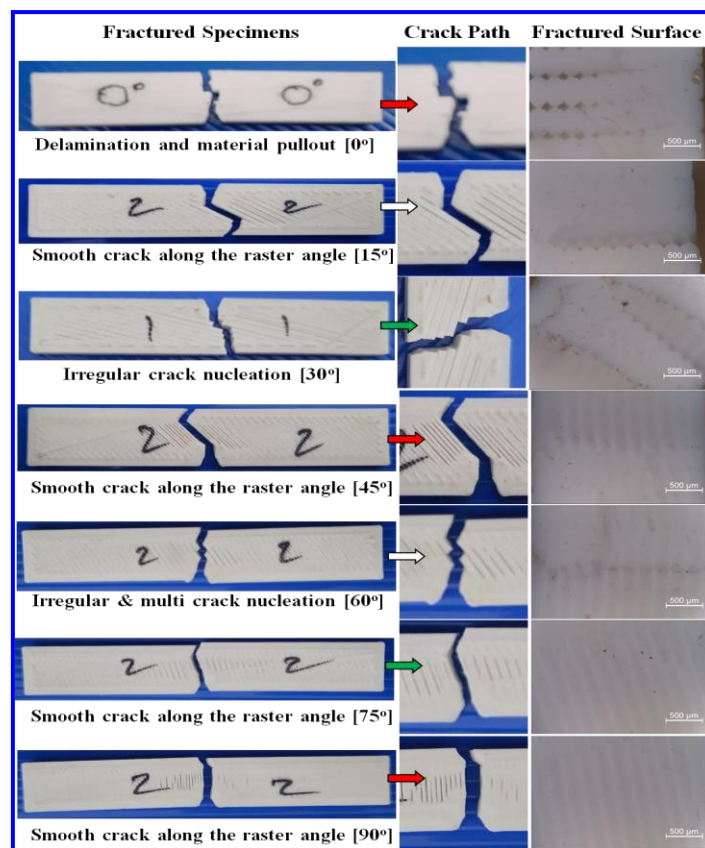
The specimens of PLA were subjected to fracture testing, and the resulting crack propagation and fractured surfaces were analyzed using a microscope. The analysis of the fractography revealed that the fracture had spread across many material planes, hence enhancing the capacity for energy absorption.
